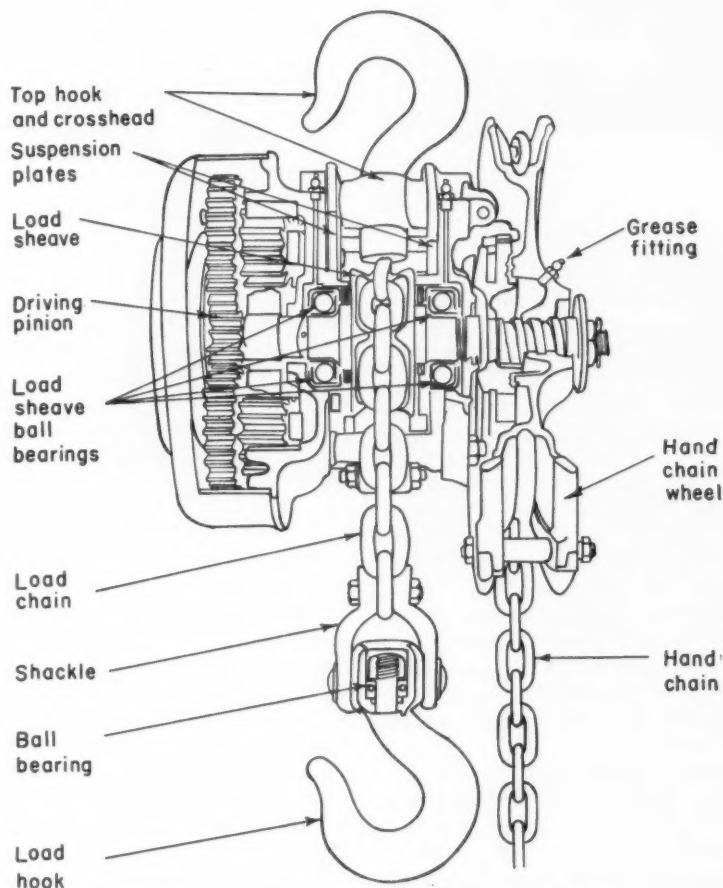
BALL-BEARING SPUR-GEARED HOIST
